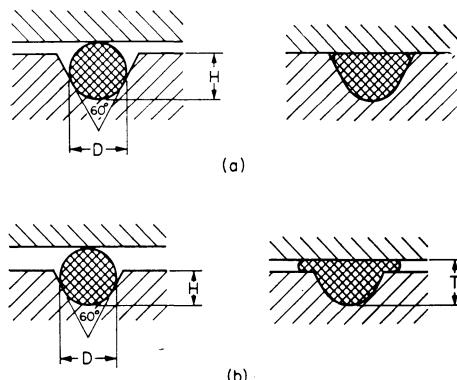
Rounded V-groove for O-ring seals: (a) with limited compression; (b) with unlimited compression
